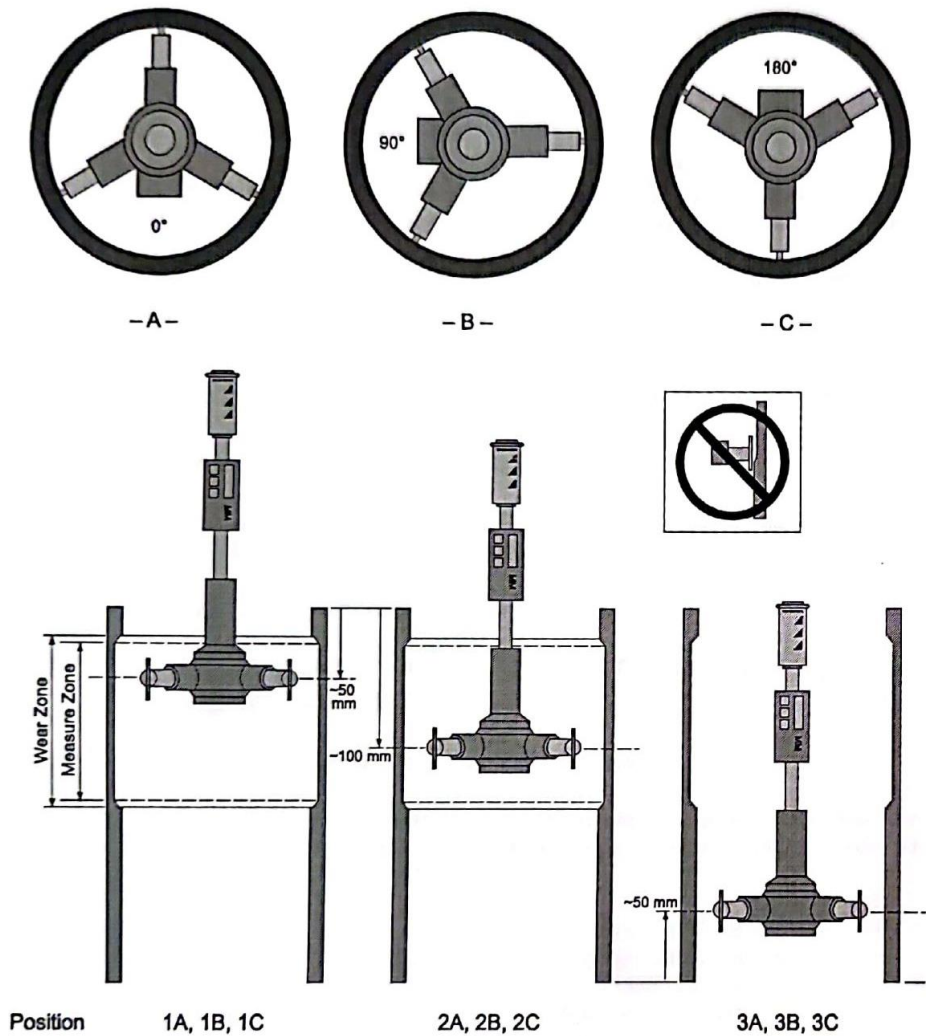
Bore Gauge Measurement Positions within the Mold Bore
